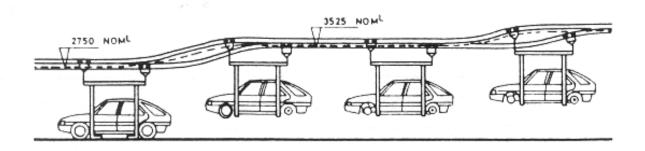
Bodies on Tyres to Final Assembly Conveyor
